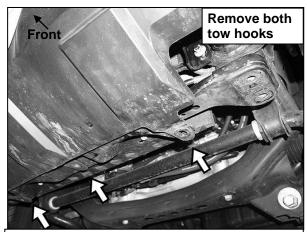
Remove hardware attaching plastic cover to back of bumper (arrows)
